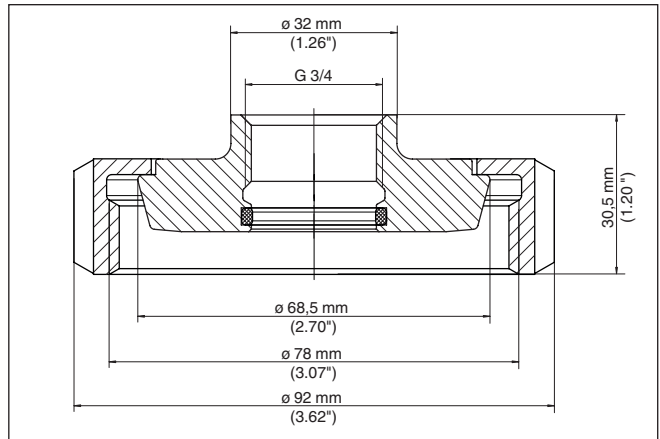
Dimensions of threaded adapter G $\frac{3}{4}$  (DIN 3852-X) on slotted nut DN 50 (DIN 11851) PN 25
